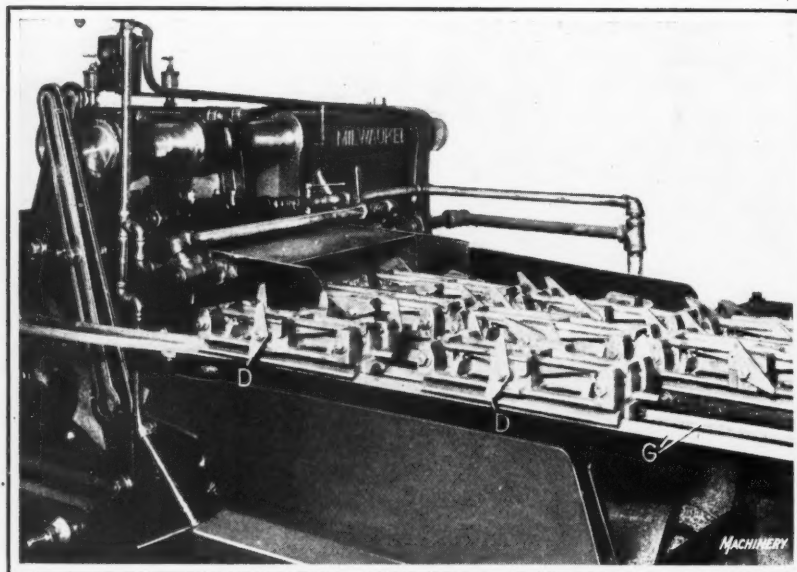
Machine and Fixtures Used for Milling Slot in "Trolley Ears"
